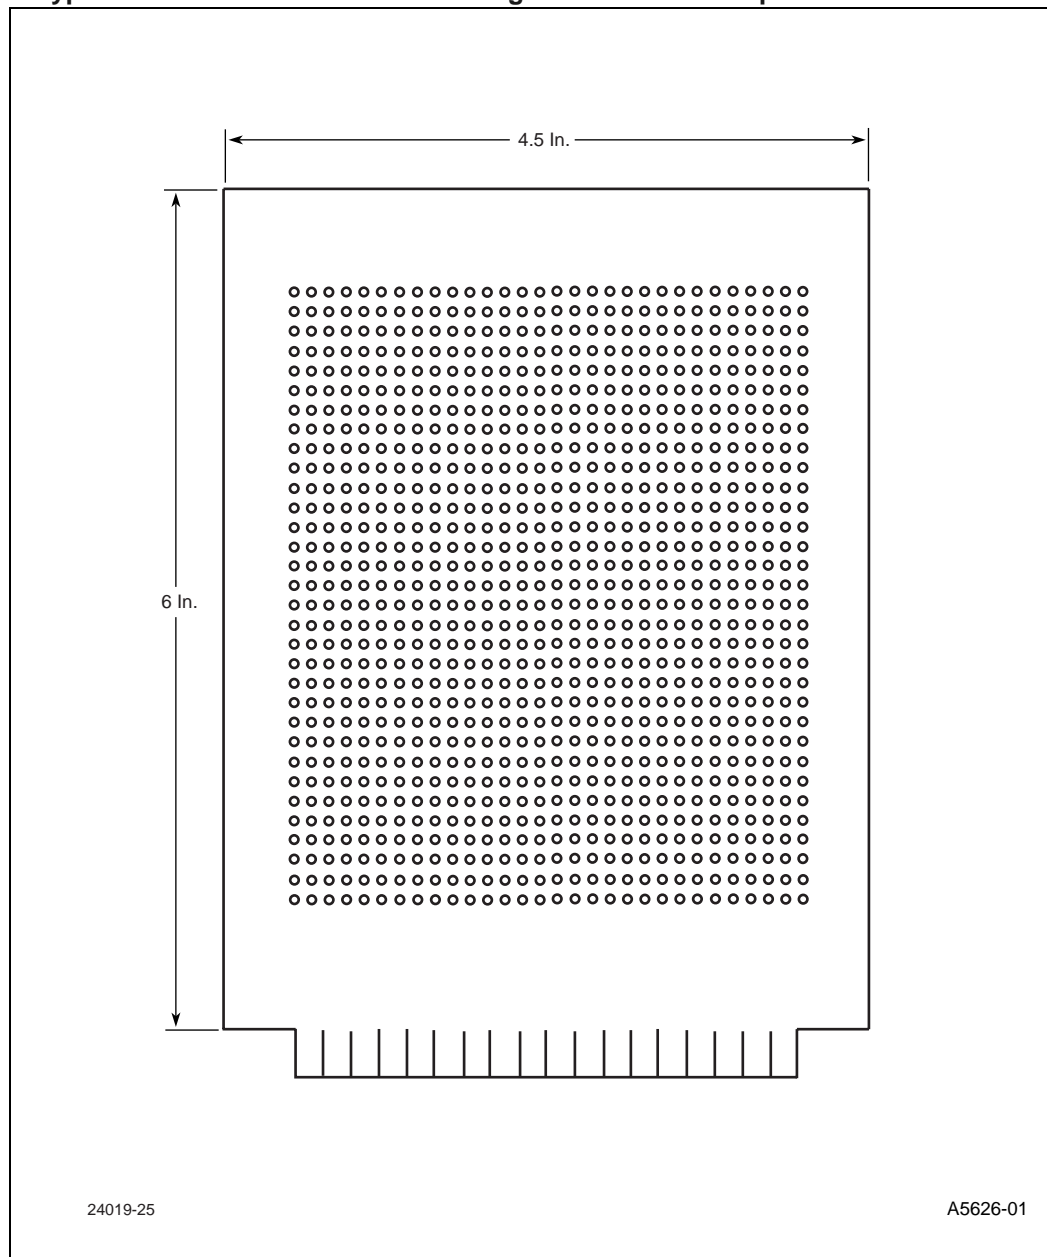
Typical Thermal Test Board for Through Surface Mount Component
